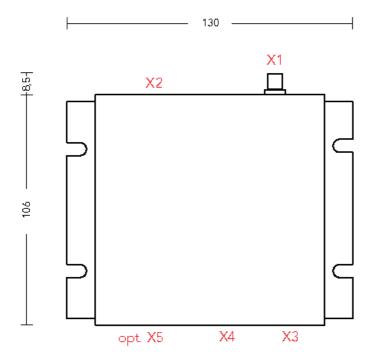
Dimensions of PulsarMX Reader (in mm)
